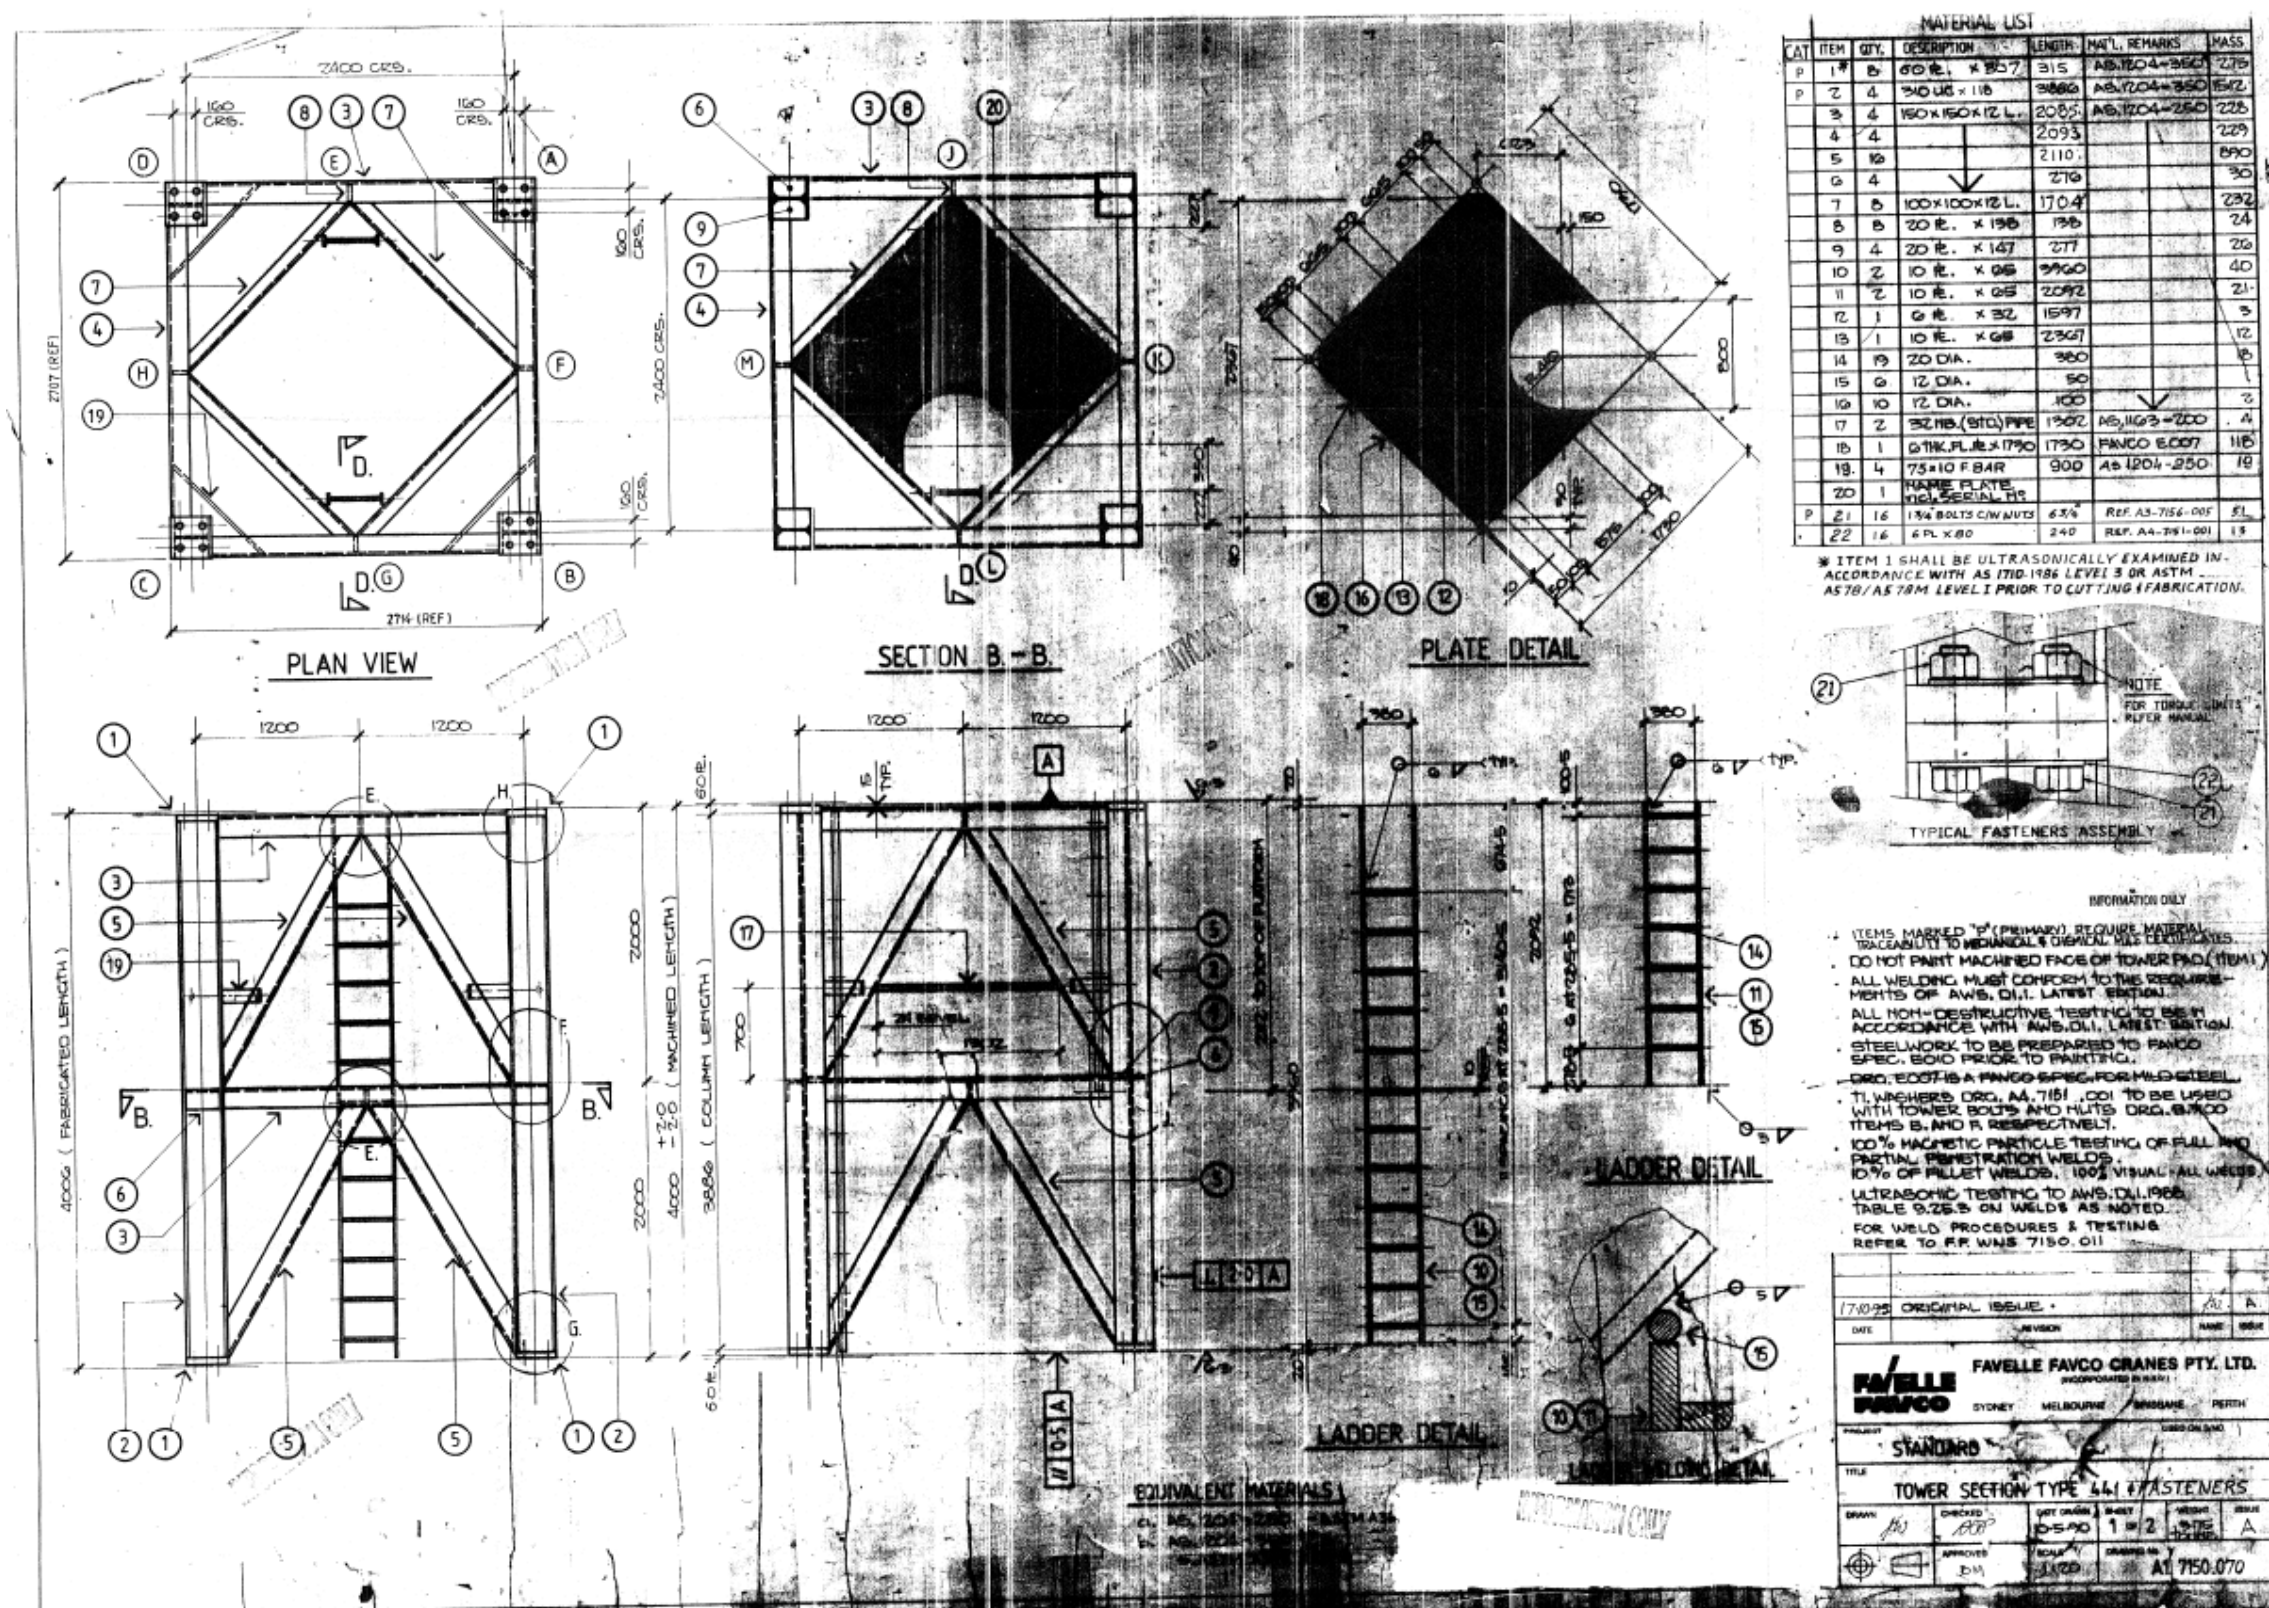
Crane Truss (not matching with actual truss). Favelle Favco drawing A1.7150.070.
